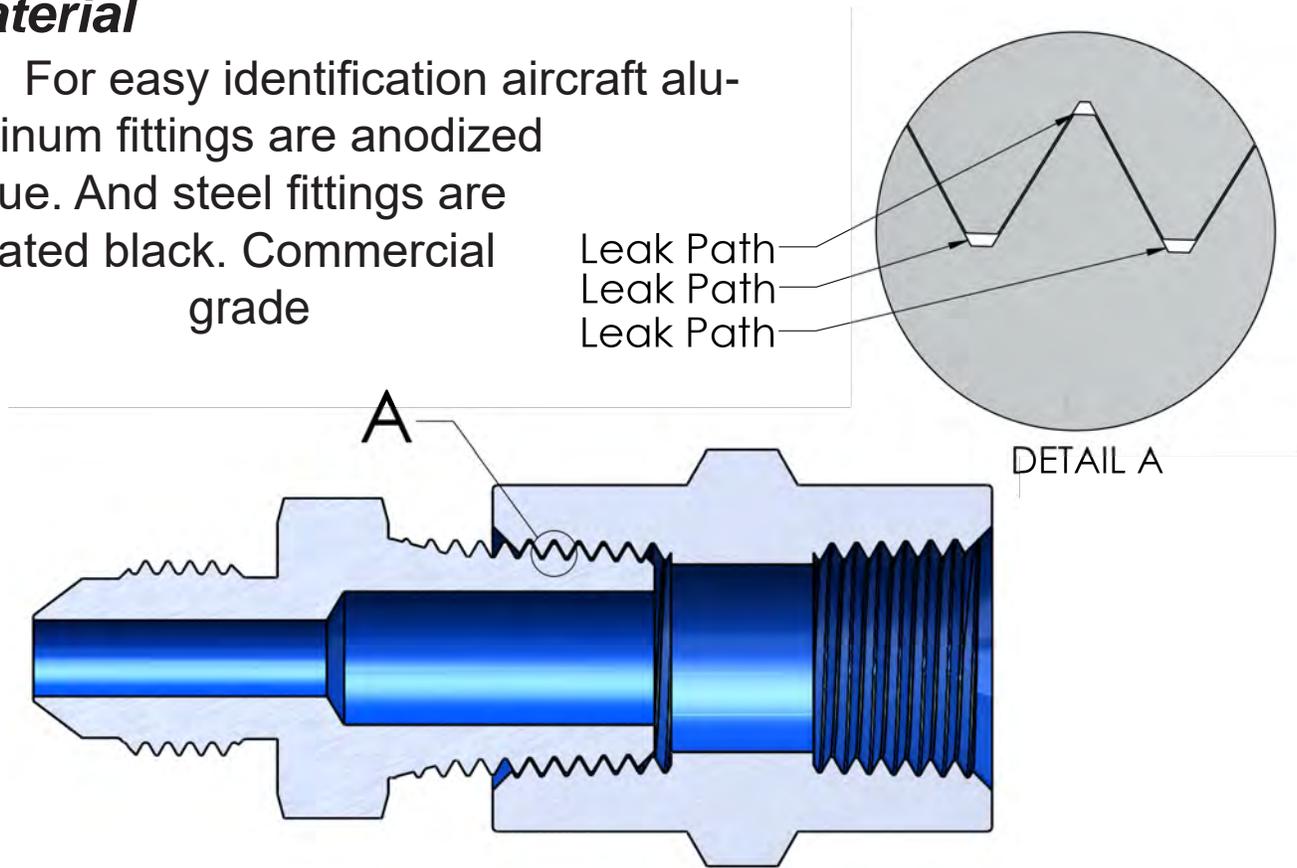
The NPT (National Pipe Tapered Thread) is constructed using a “Sellers” thread (truncated peaks and valleys)
